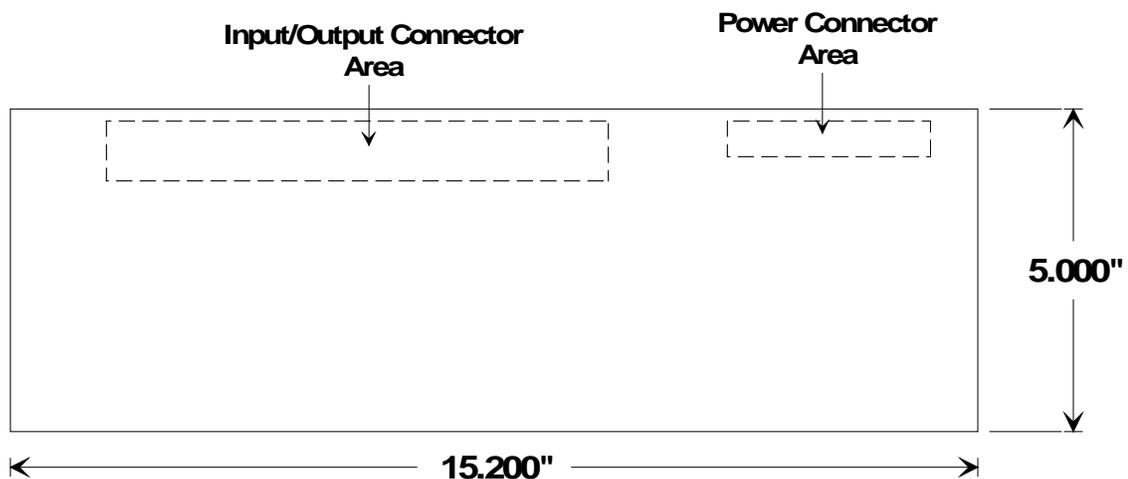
ASIC Test Bed Printed Circuit Board dimensions.
